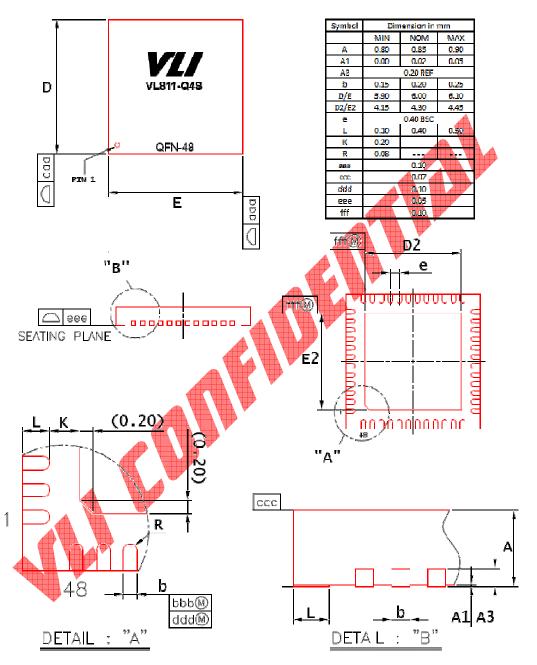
Mechanical Specification -QFN 48 6x6x0.85 mm Package
